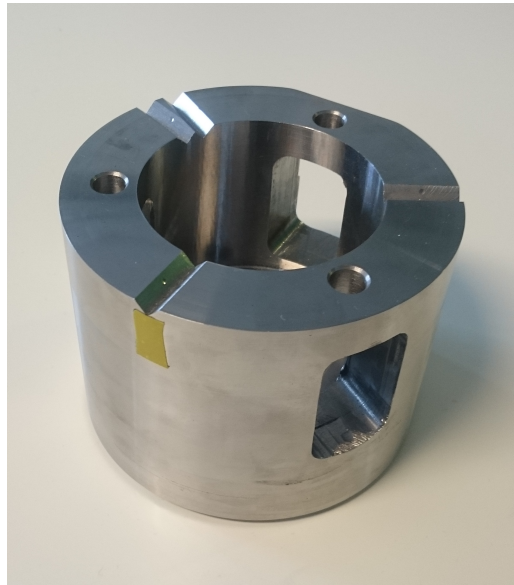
The offset plate with the TA20 tool attachment mounted.
